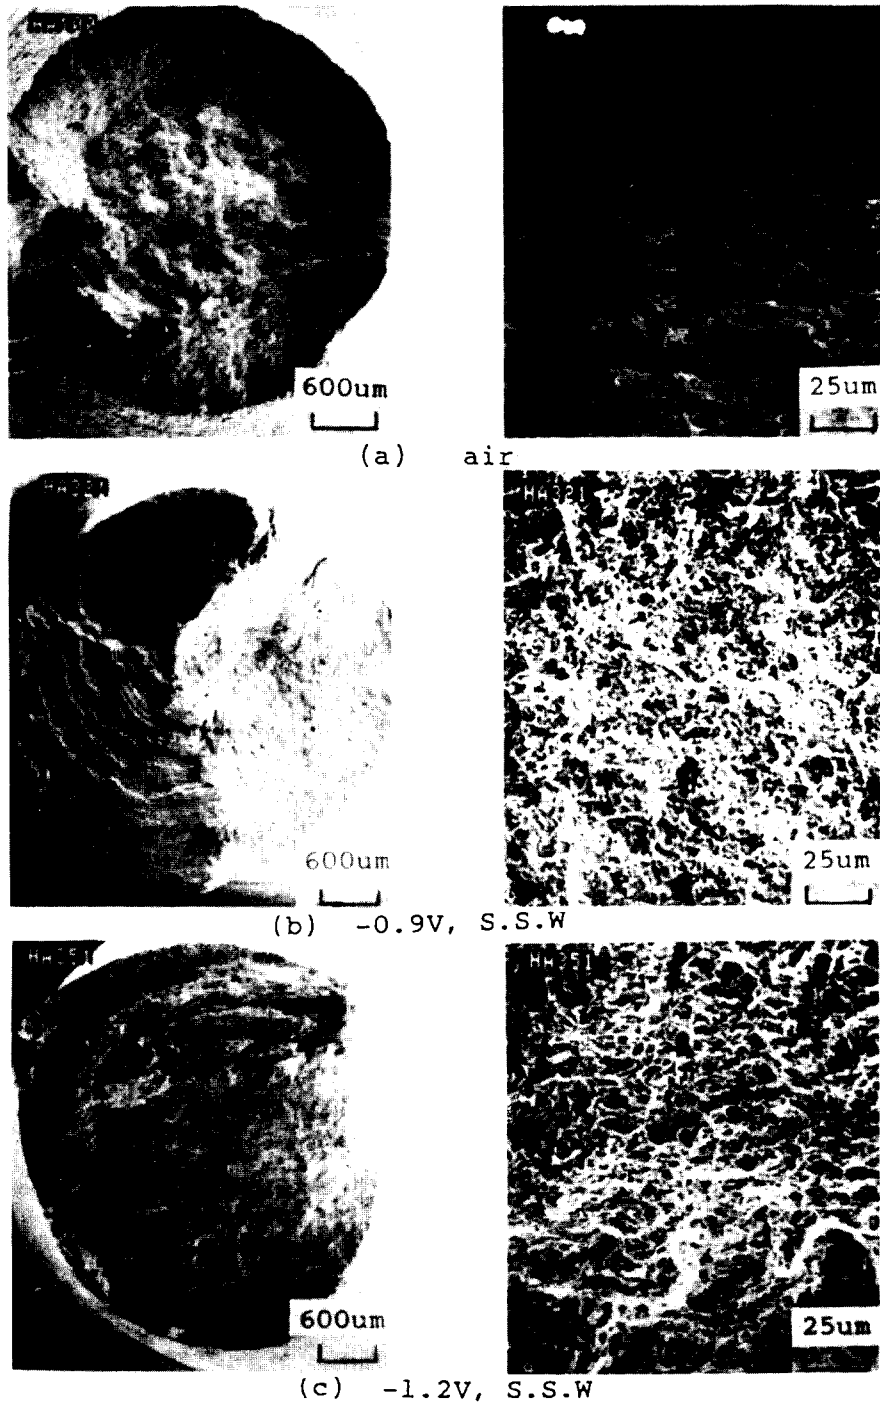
Micrographs of fracture cross-section and surfaces of SM20 welded joint under cathodic protection in S.S.W. and in air
